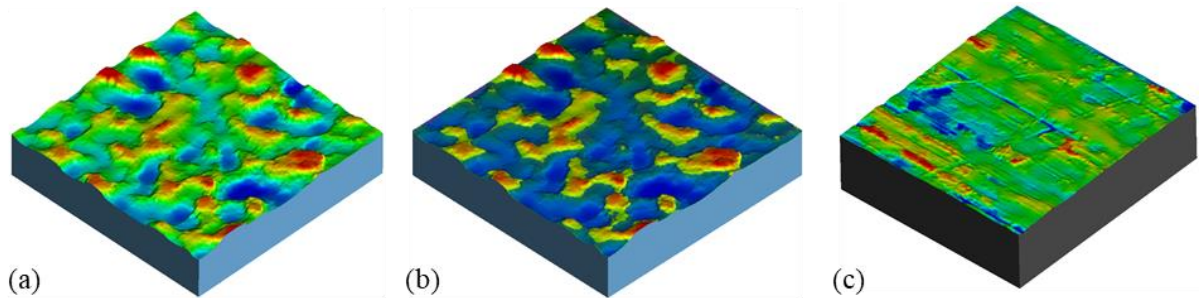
EDT surface of investigated blanks in (a) dry and (b) lubricated condition; (c) surface topography of the tool with MF texture
